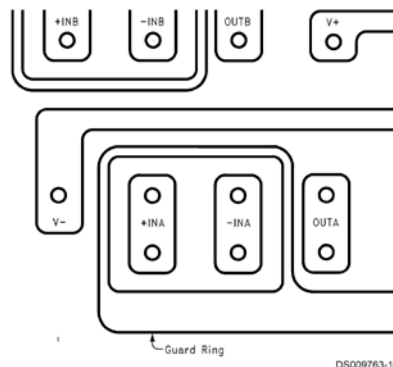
Example, using the LMC660, of Guard Ring in P.C. Board Layout
